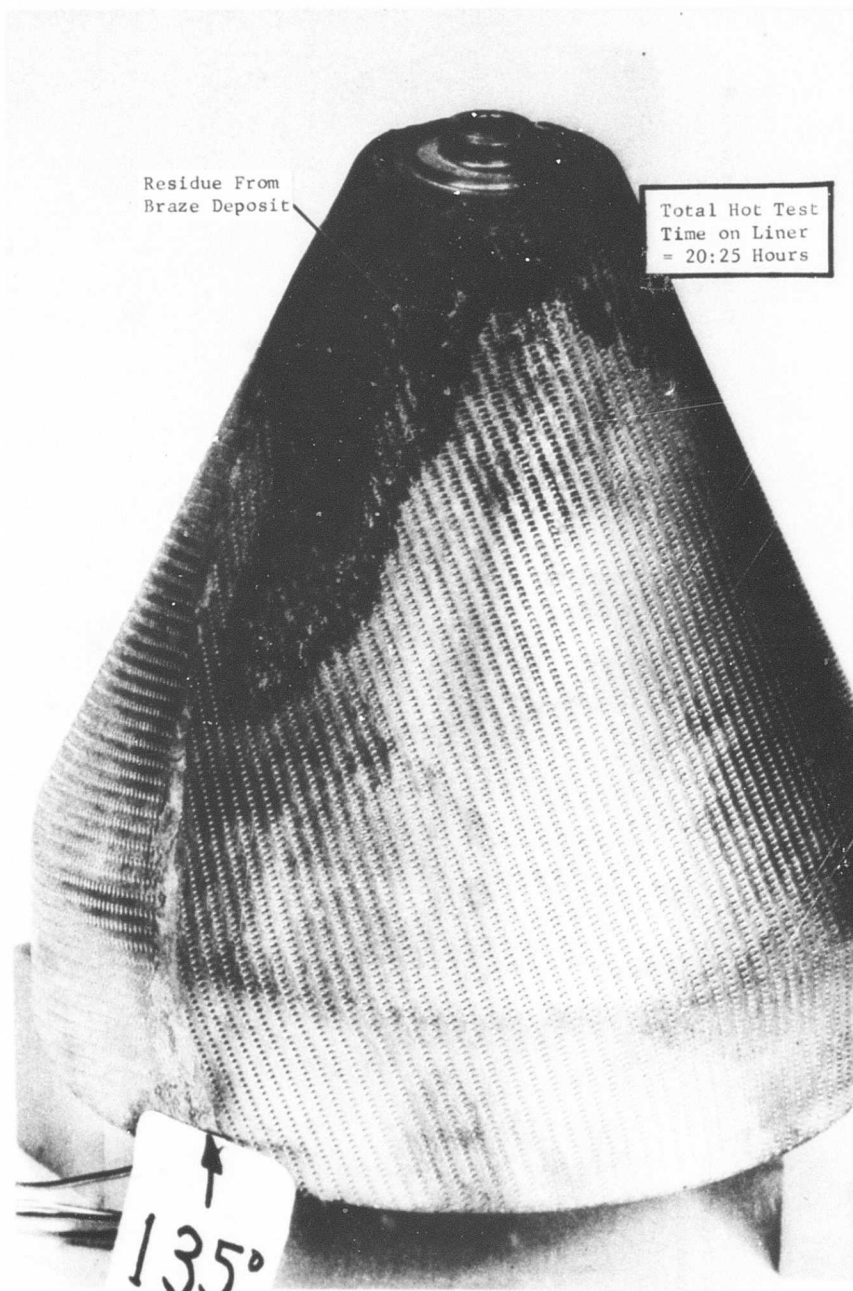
Post-Cleaning Photograph Showing Damage to Hot Side of Transpirationally Cooled, Conical Shaped, Inner Liner Due to Braze Deposit.
